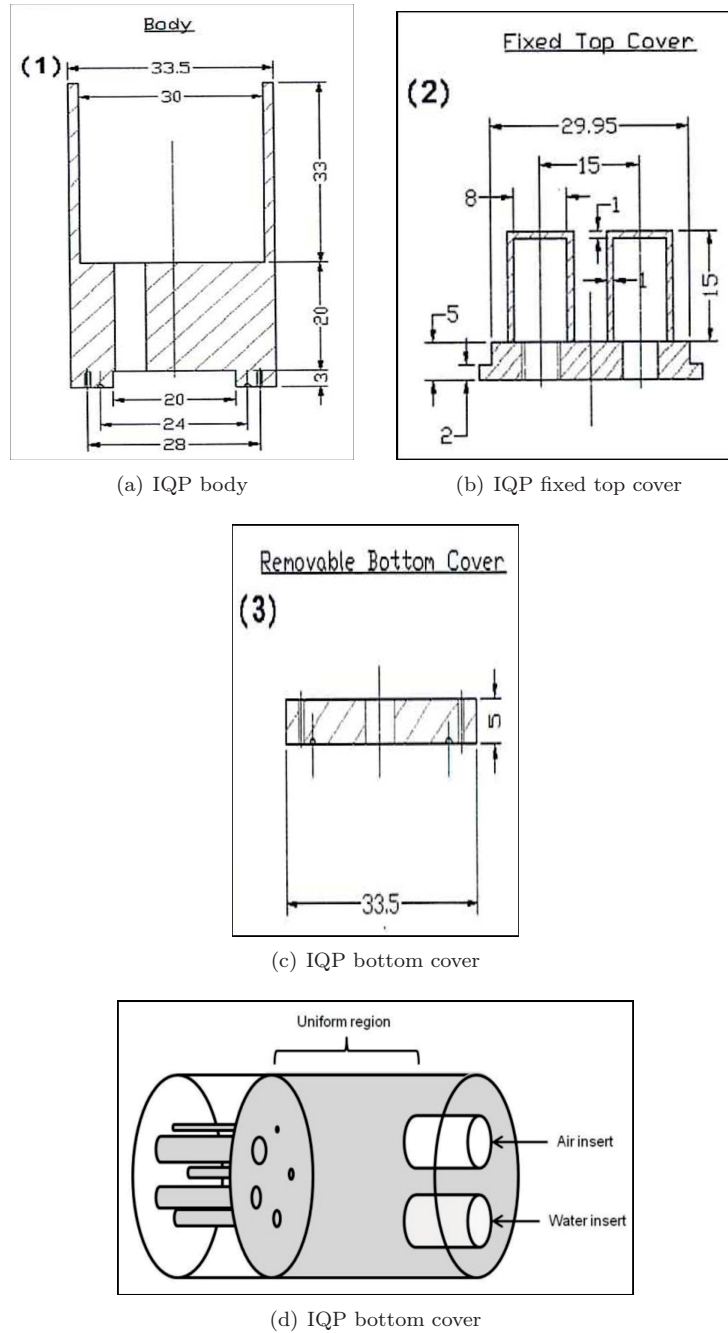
Illustration of IQP geometry consisting of three parts: (1) Body, consisting of a large fillable cylindrical chamber at the top and a solid part at the bottom; (2) Top cover, supporting two cold regions; (3) Bottom cover, to cover the bottom part of the body (Reprinted from NEMA NU-4 2008). Complete IQP is shown at the bottom as used to estimate the quality of reconstructed image in terms of RC and uniformity (Reprinted from [Anizan 12])
